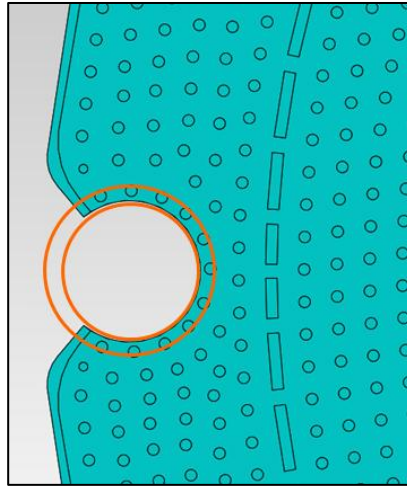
Top view of the cooling plate to show the cross section of the header at the inlet joint
